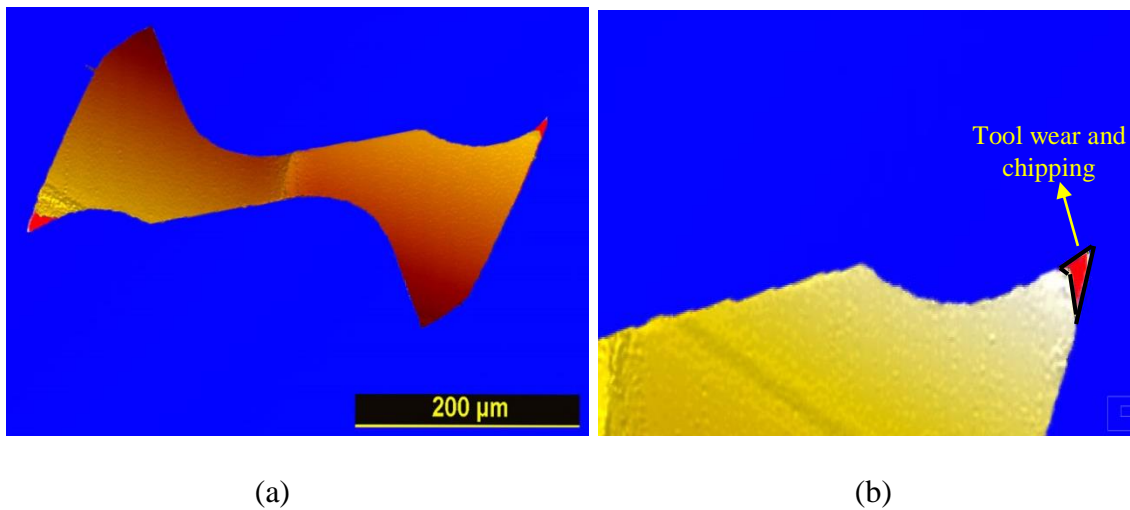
(a) Top view of machined tool superimposed on top view of new micro tool (b) One of the cutting edges magnified to calculate tool wear and chipping after milling 24 mm, 316L stainless steel, 27 m/min speed, 1 $\mu\text{m}/\text{tooth}$ chip load, $\Phi 0.406$ mm uncoated WC tool, 30 μm depth, MQL.
